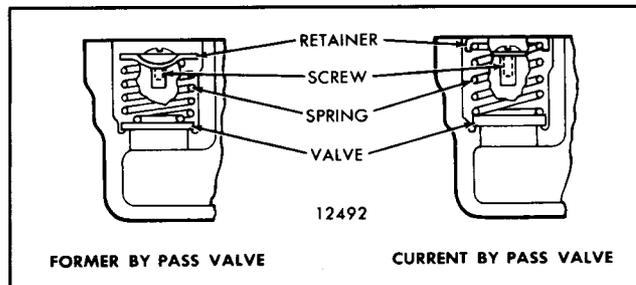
Bypass Valve Assembly Secured by Retainer and Screw
